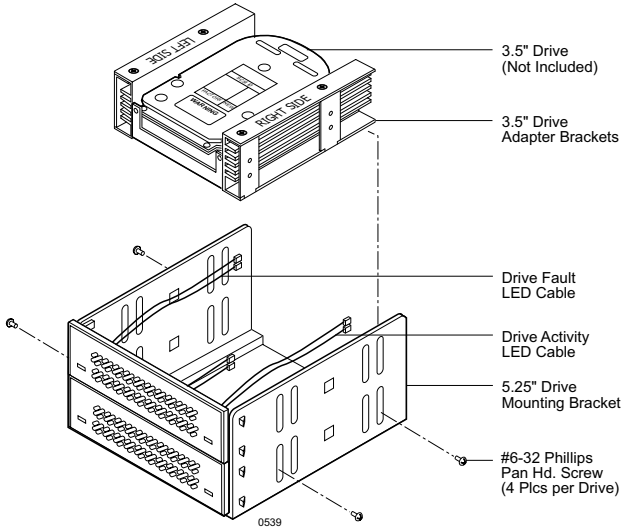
Attaching the 3.5" Adapter Brackets to the Drive
